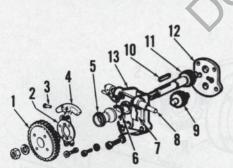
Exploded view of governor and oil pump assembly.
